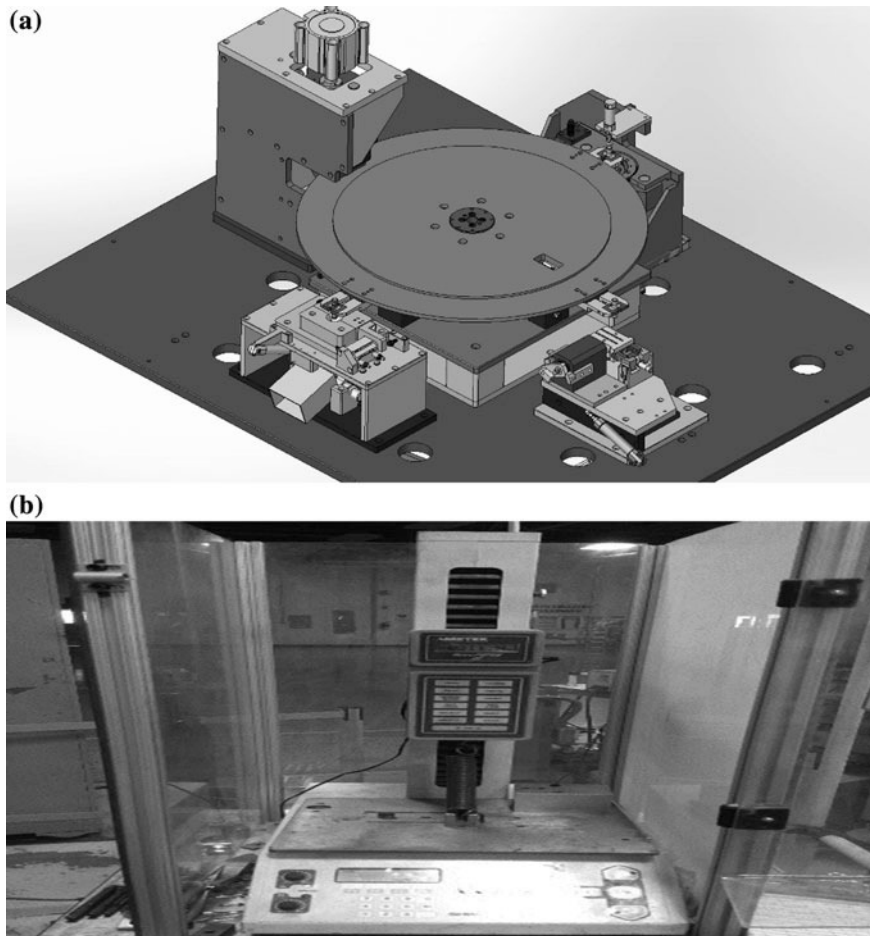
a Partial drawing of the crimping machine, b Pulling testing equipment used for these experiments
